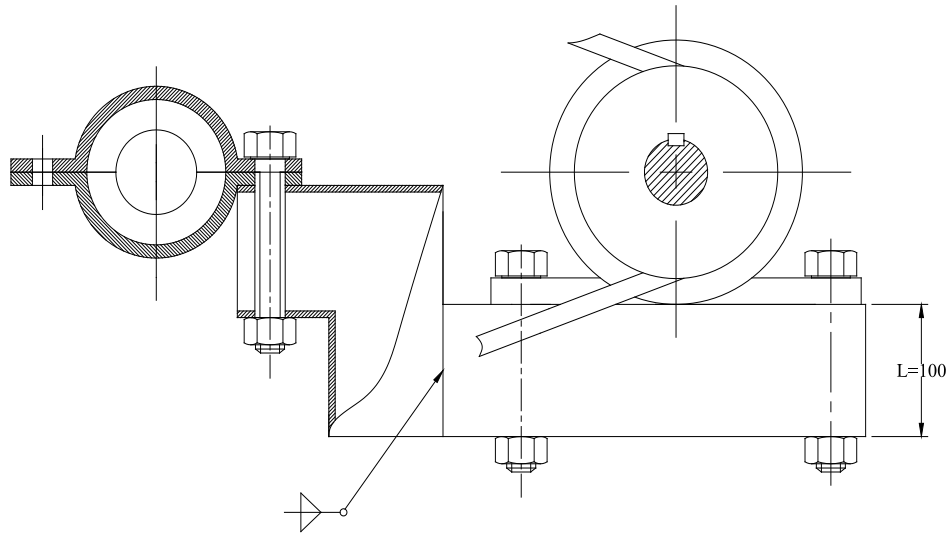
Fillet Weld indicated by the symbol
